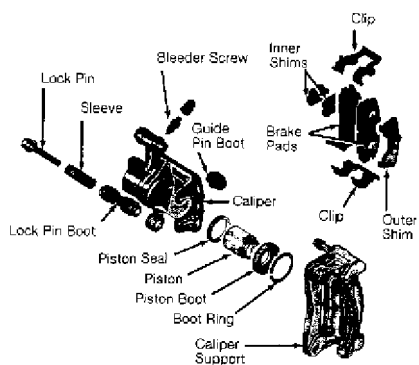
Exploded View Of Rear Disc Brake Caliper Assembly
